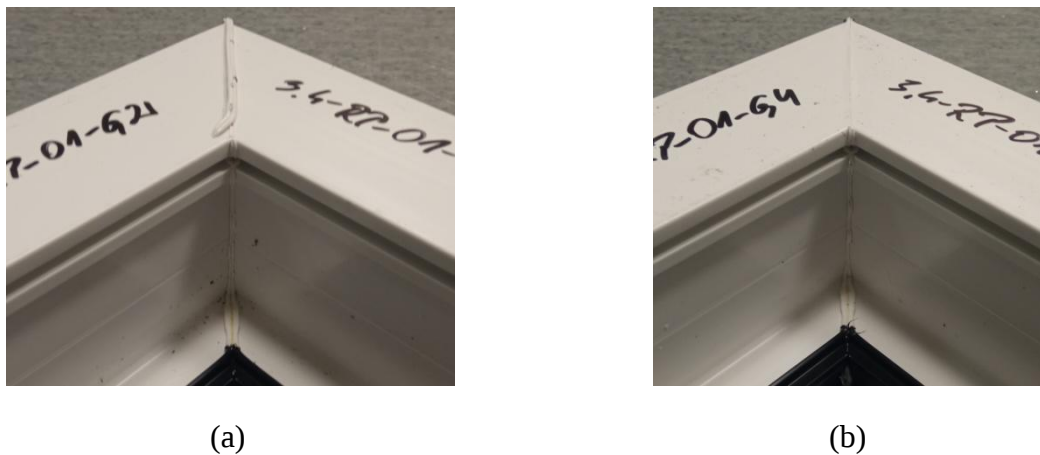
Representative welds from the reconnaissance tests: (a) welded using head 2, (b) welded using head 4 [12]
